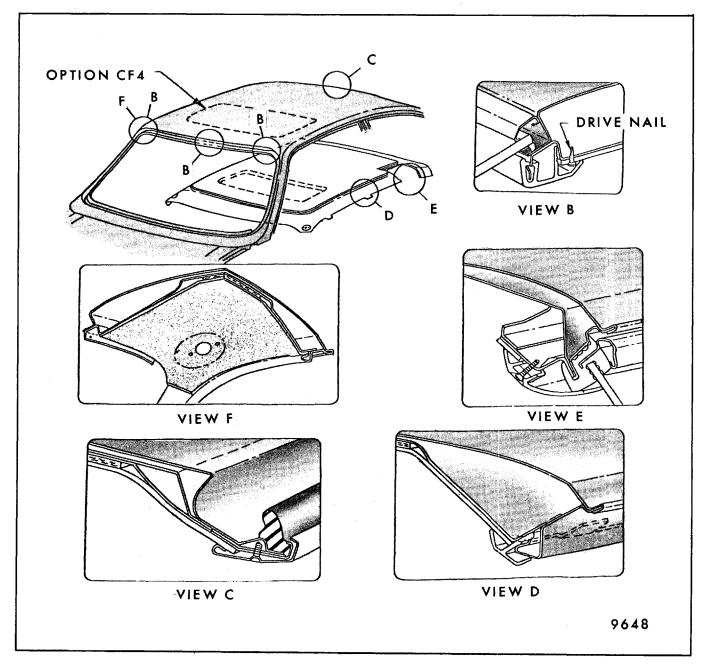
H Style Headlining Installation for Optional Sun Roof and Vista Vent 07 Shown, 27 Similar
